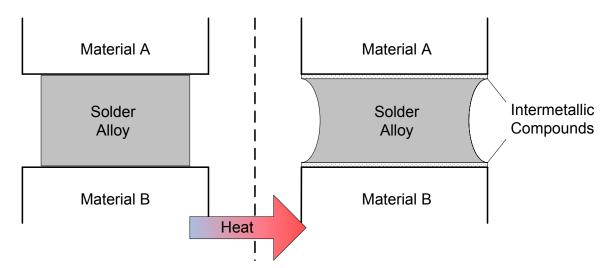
Illustration of the solder bonding concept. Heat applied to the solder causes it to melt and spread over Materials A&B.
